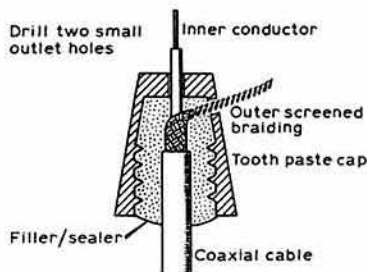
G3MCK's improved method of waterproofing the ends of coaxial cable with reversed toothpaste cap
